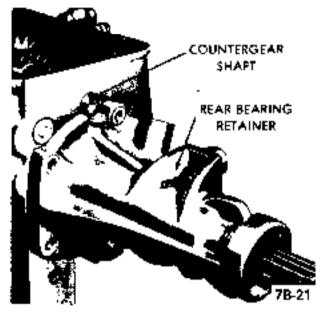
B-22 Position of Rear Bearing So Countergear Can Be Removed
